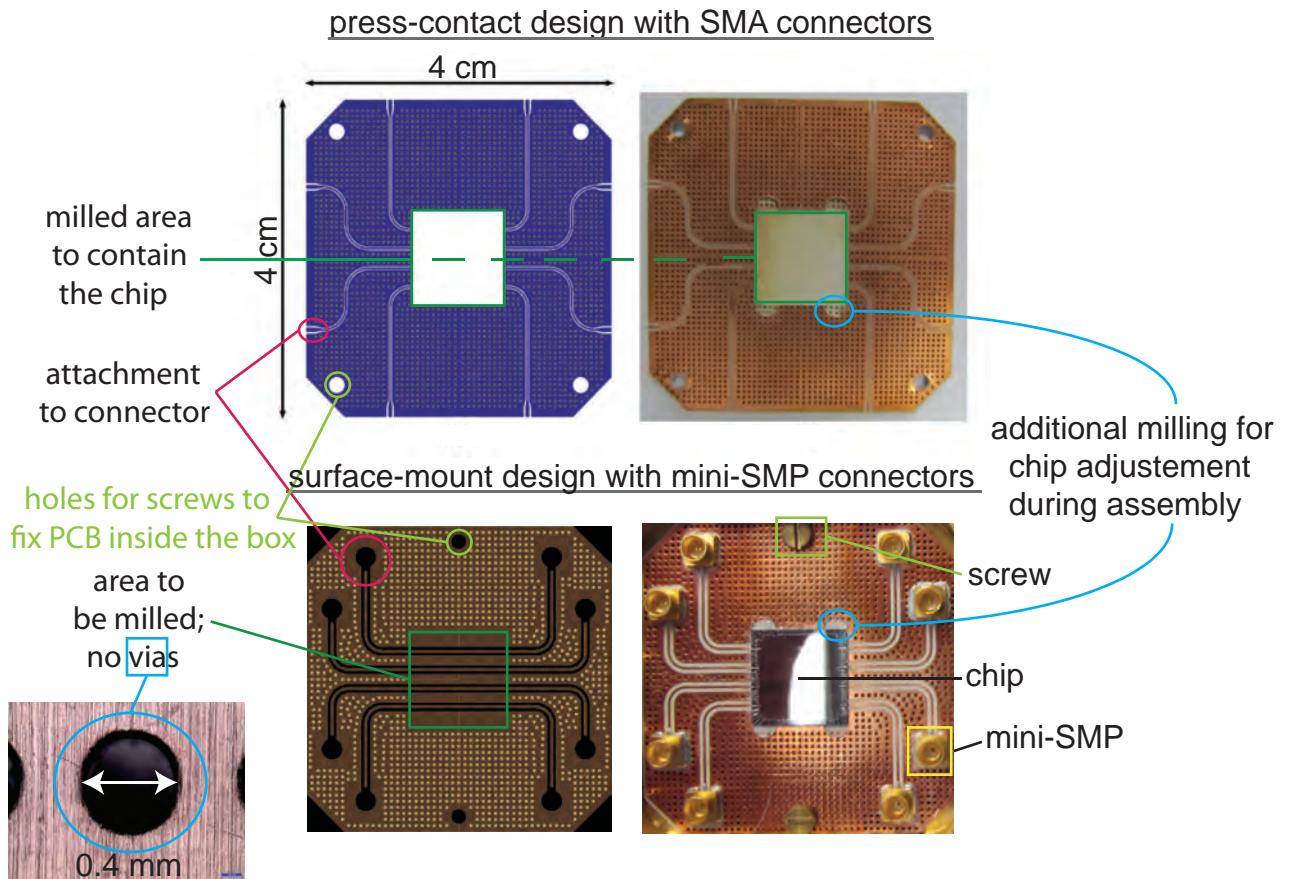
Layout (left) and photographs (right) of the press-contact and surface-mount type PCBs.
